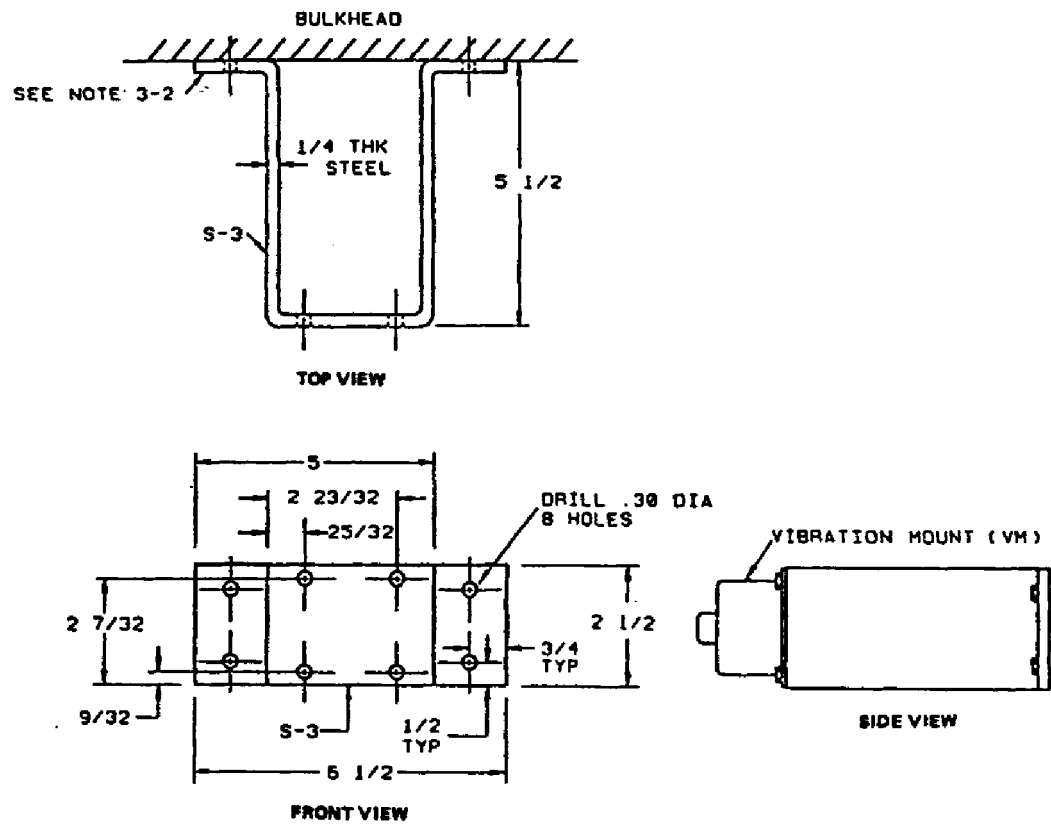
Automatic Combustion Control Calibration Panel Drawing (Sheet 12 of 13)
